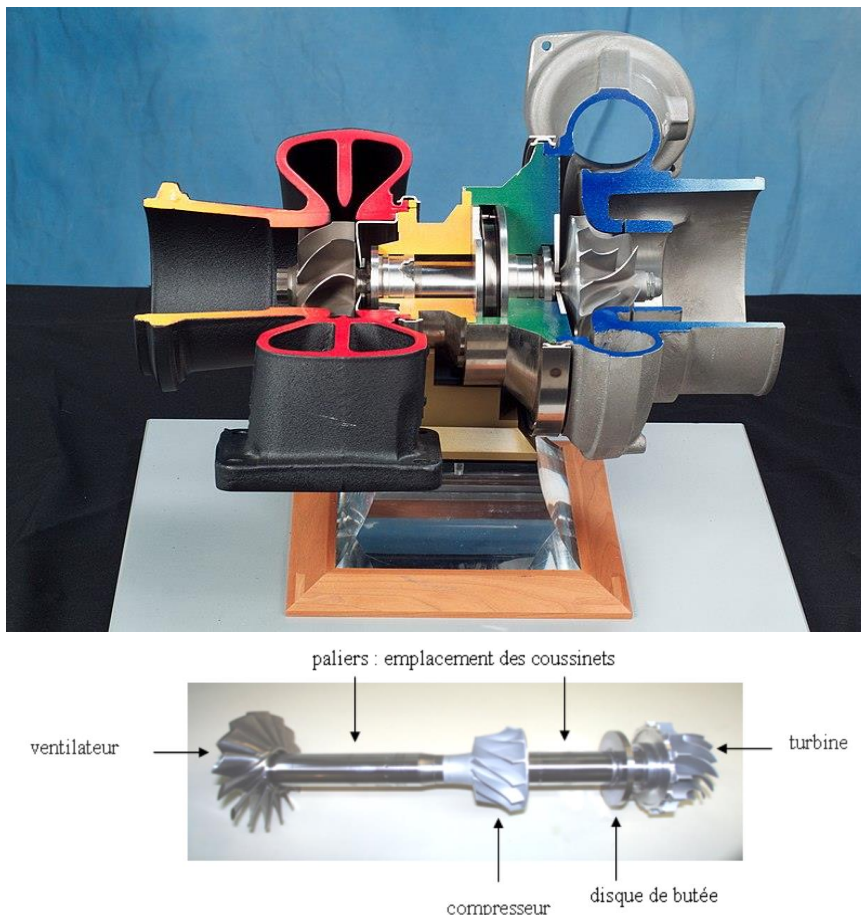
Cut-away view turbocharger (turbine section on the left, compressor section on the right)
